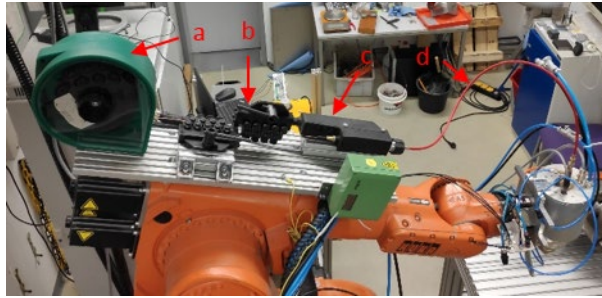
Setup for processing wire a) wire storage, b) straightening unit, c) wire feed unit and d) flexible tube for wire guide
